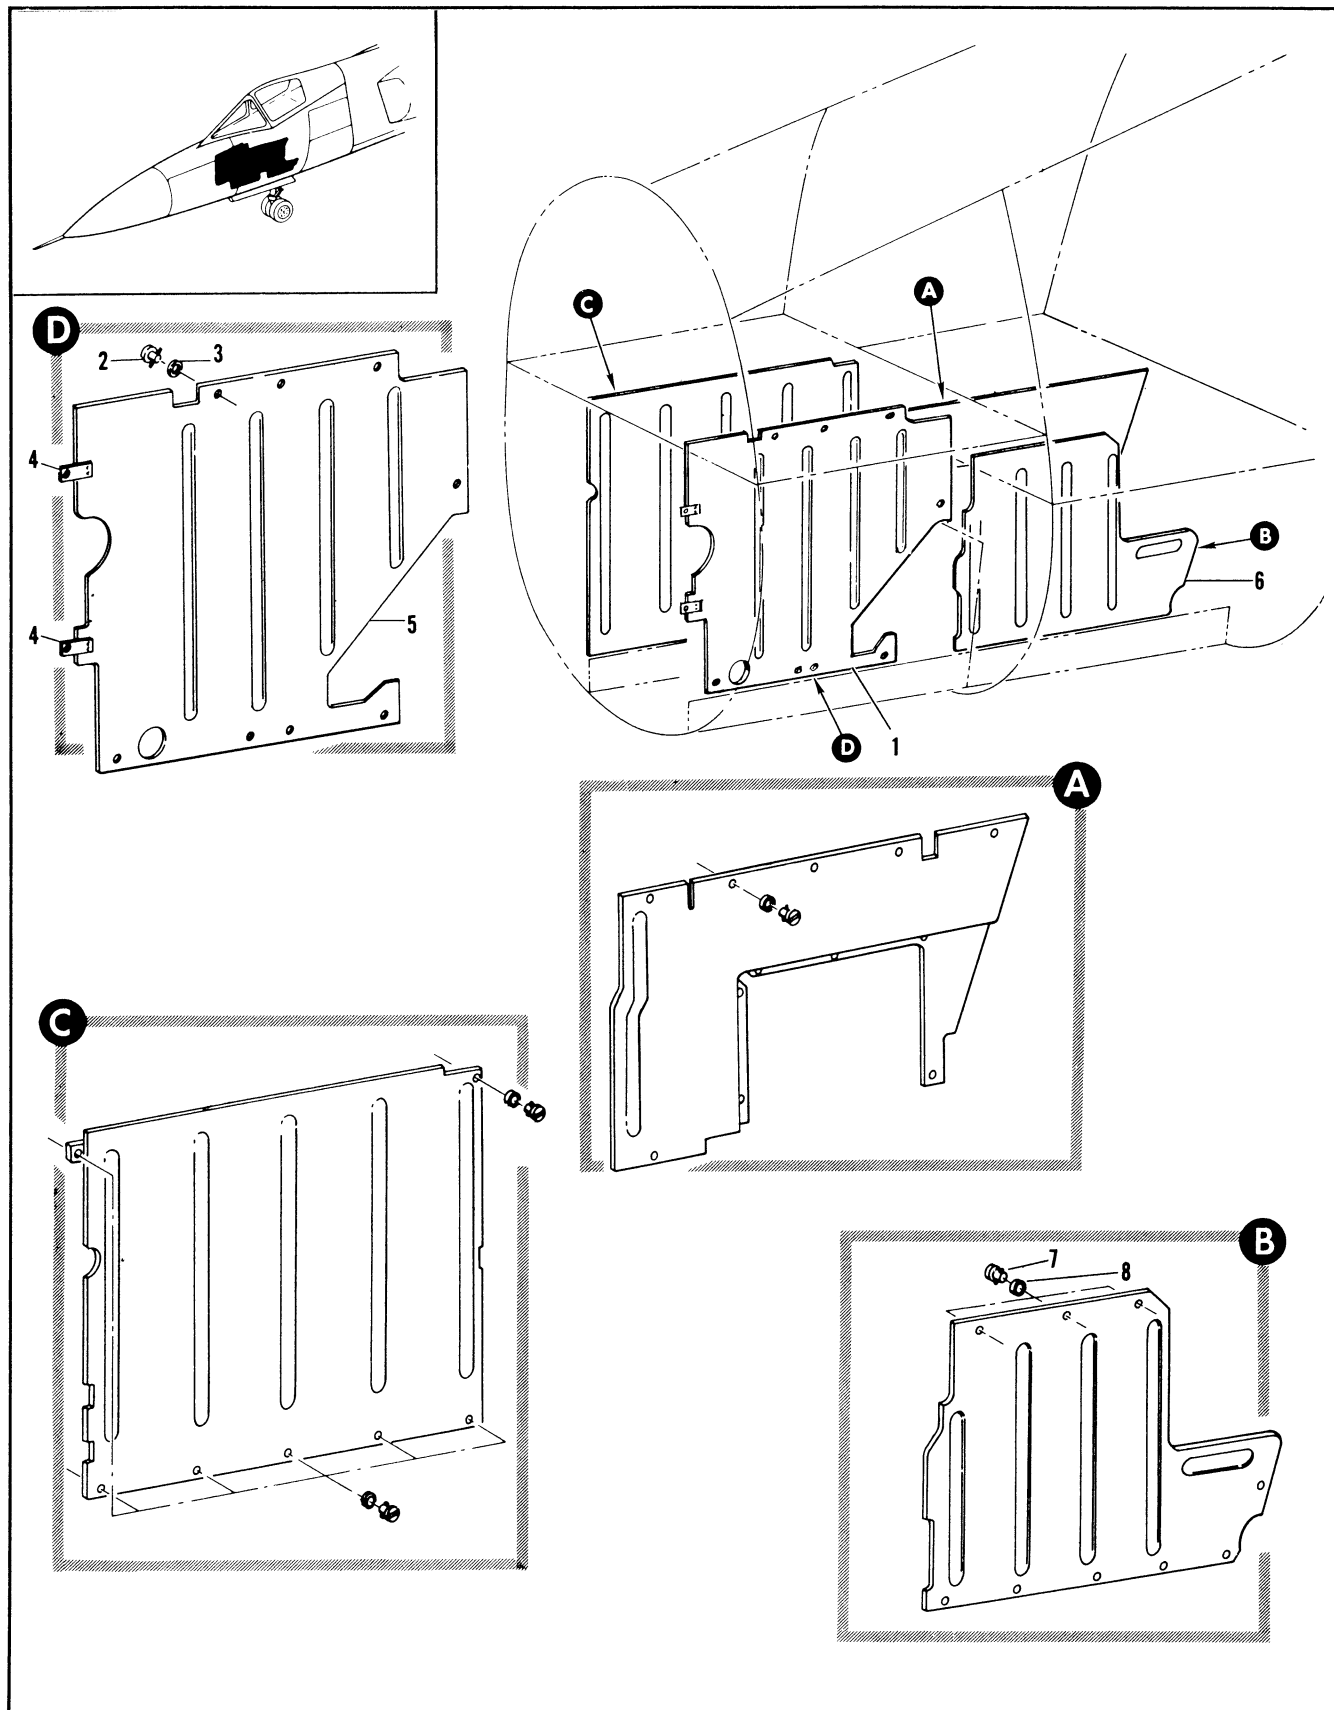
Nose Wheel Well Splash Cover Installation (Sheet 1 of 2)
